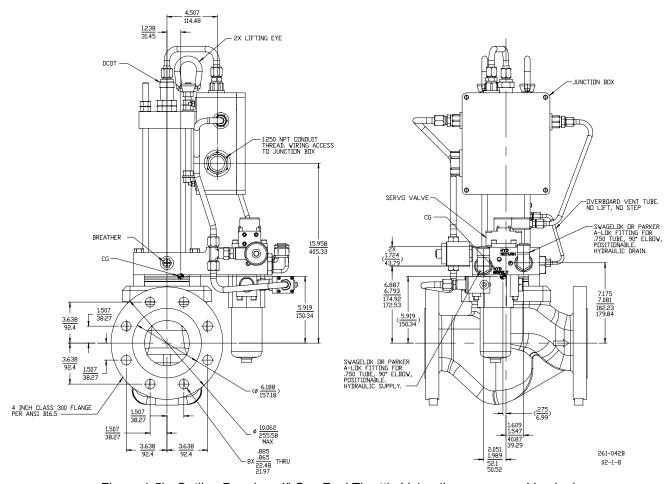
Outline Drawing, 4" Gas Fuel Throttle Valve (Low-pressure Version)
